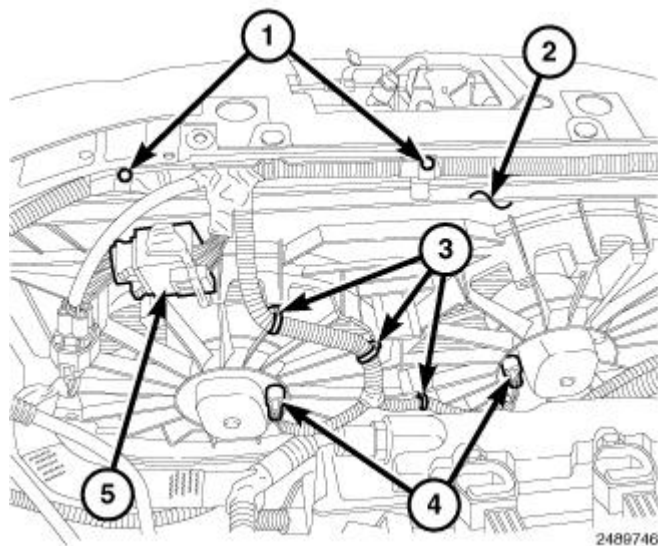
Locating Cooling Fan Module, Screws, Retainers & Connectors
